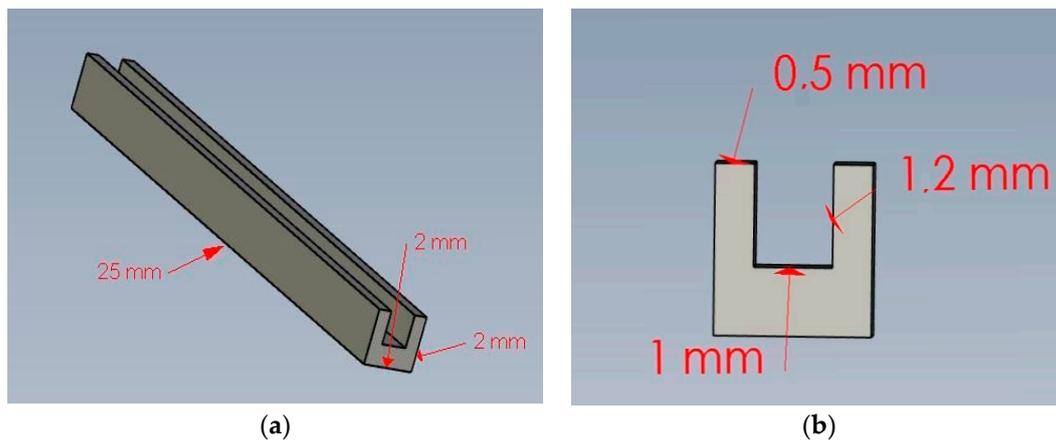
(a) A test specimen with a channel for manufacturing using CAM technologies; (b) cross section of the same object.
